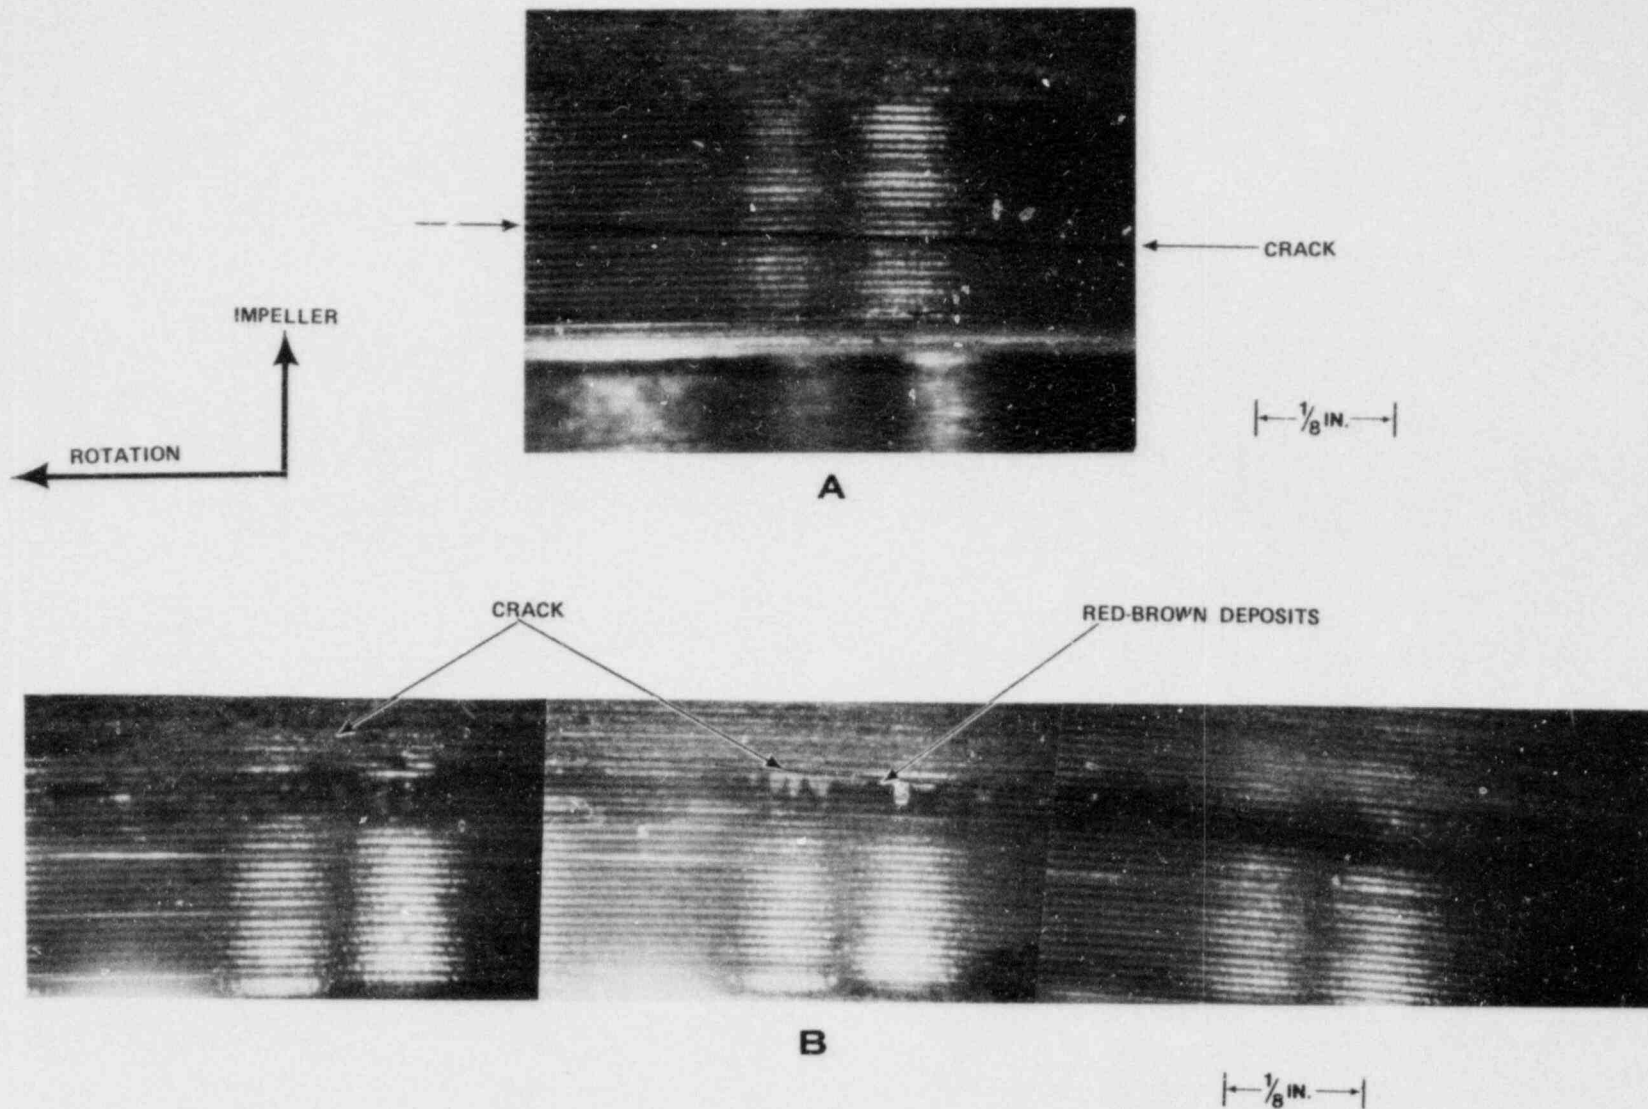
Surface Appearance of Shaft Near Crack
